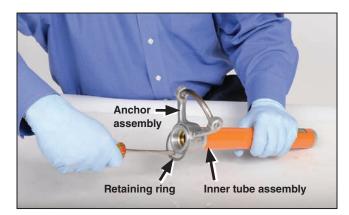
Pry the retaining ring until it comes off of the inner tube assembly.
